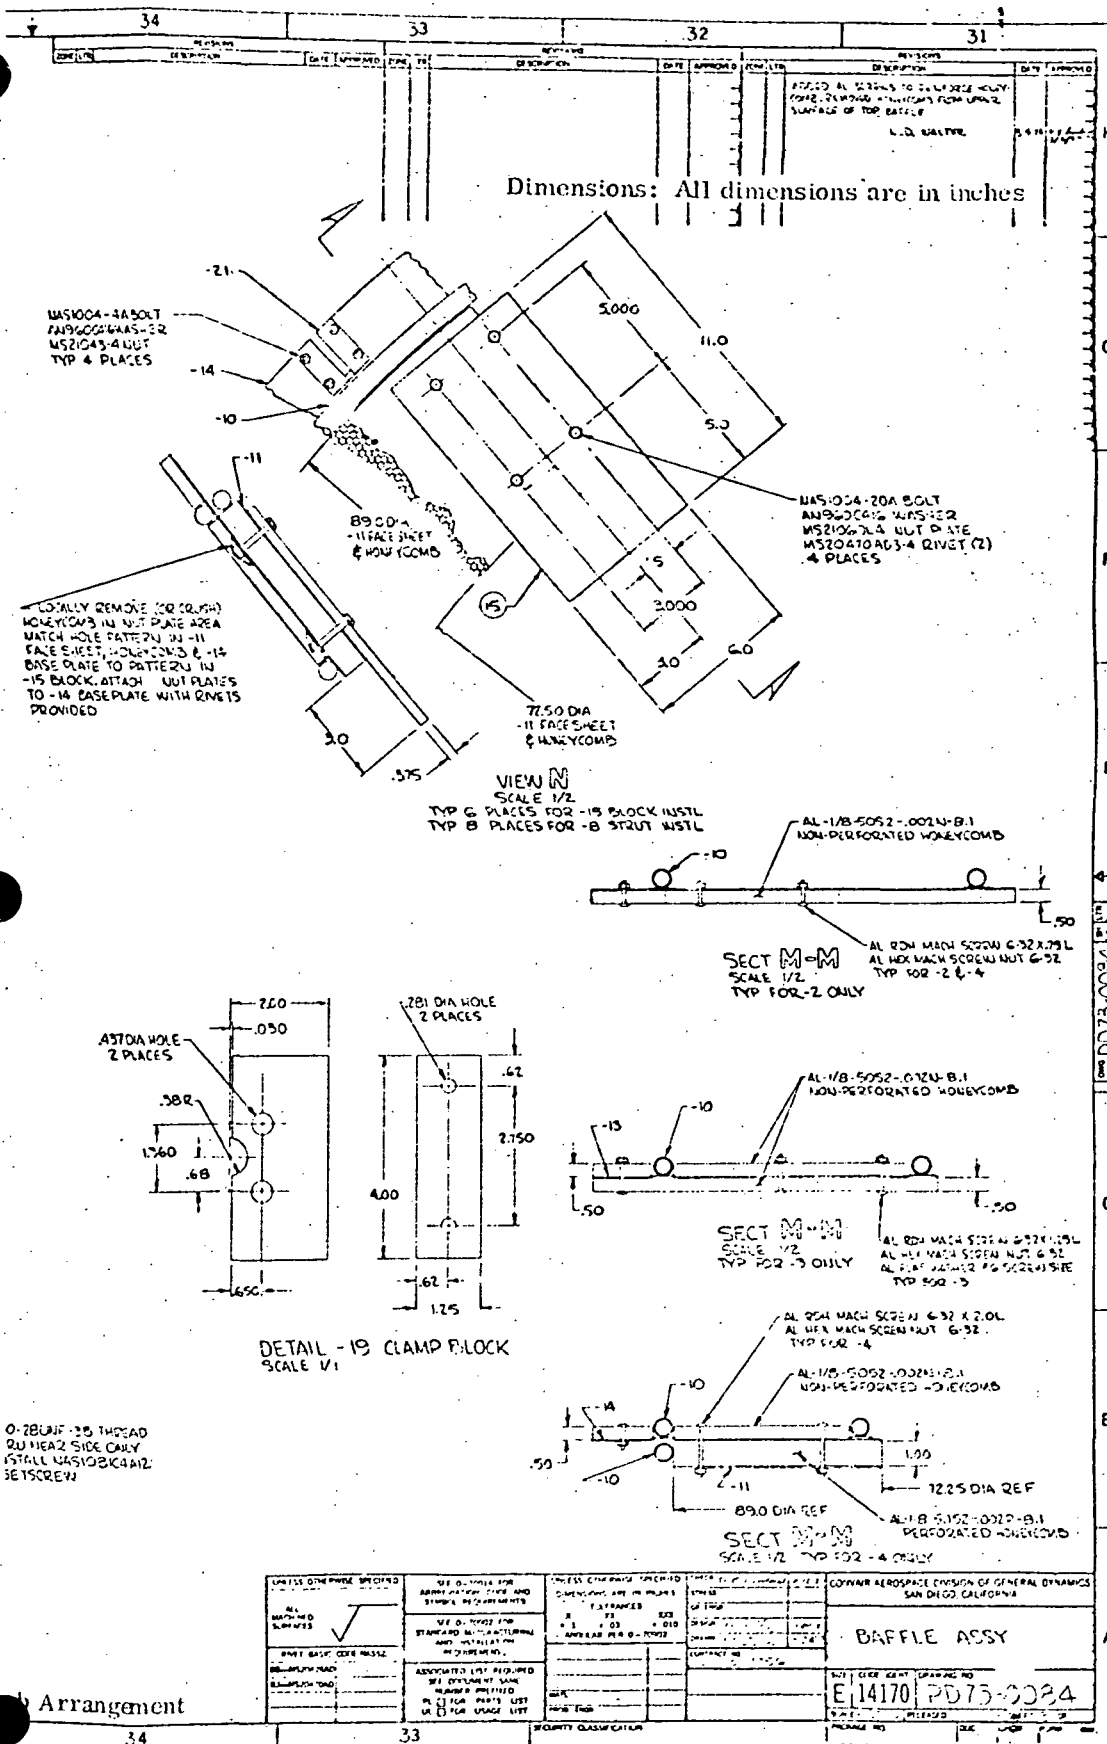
Baffle Assembly - Cooling Coil Arrangement
